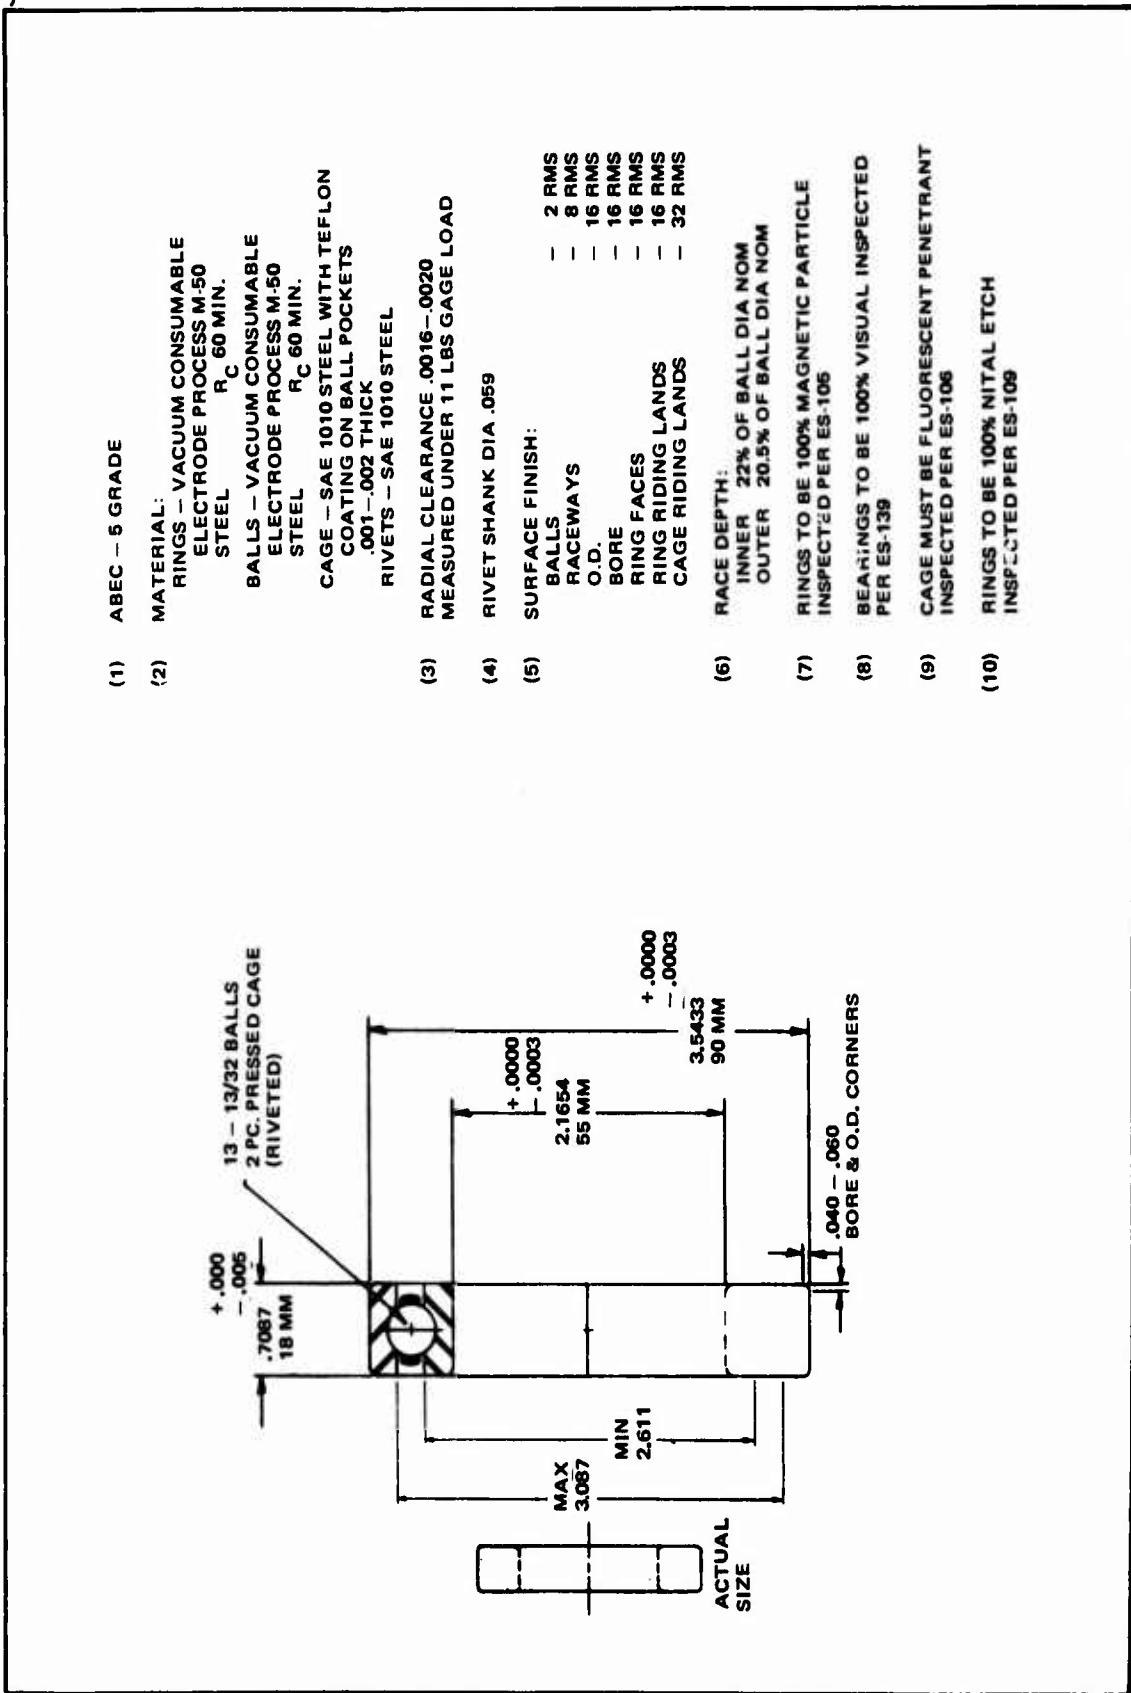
Pressed Steel Cage With Teflon-S Coating.
